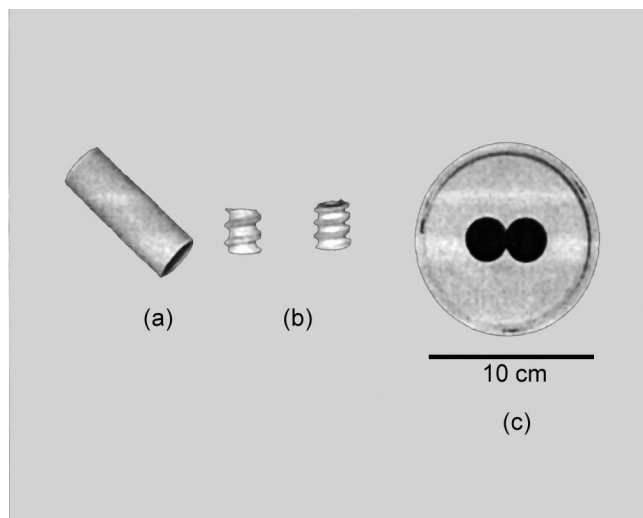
Left to right (a) tube, (b) screw and (c) machined complex alumina parts formed by gelation of acrylamide.
